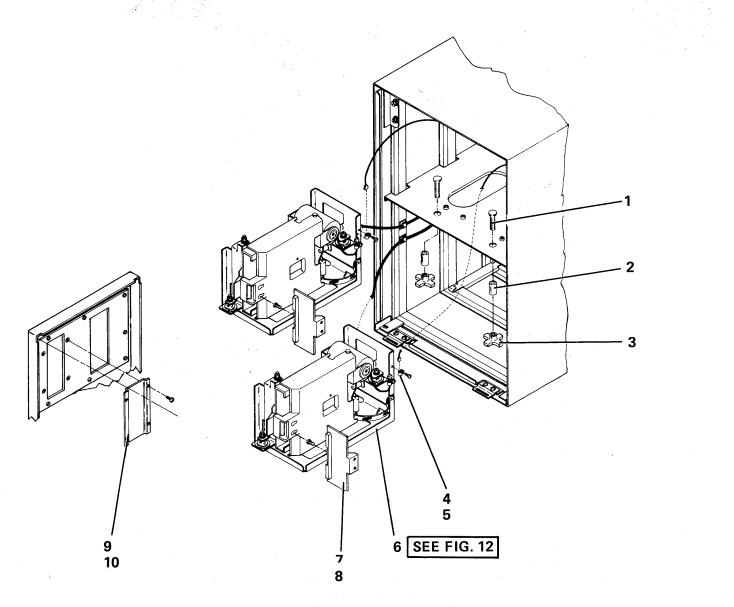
FINAL ASSEMBLY. SEE LIST 5.
